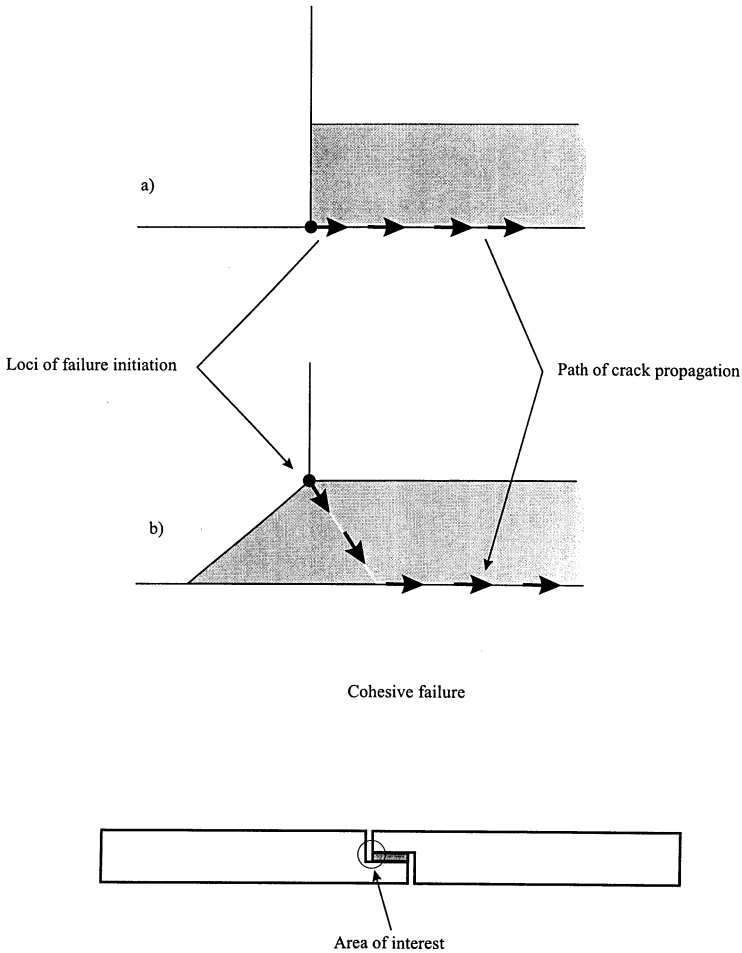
Paths of crack propagation for a) joints without fillets and b) joints with 45° fillets.
